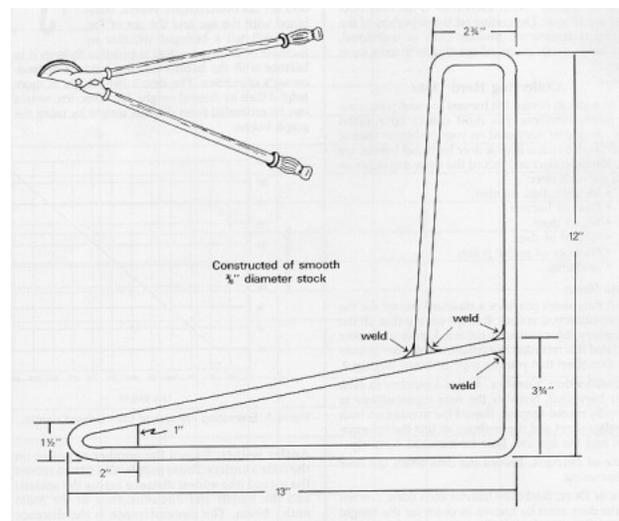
A jawbone extractor can be purchased or can be fabricated using smooth 3/8-inch-diameter rod stock.
